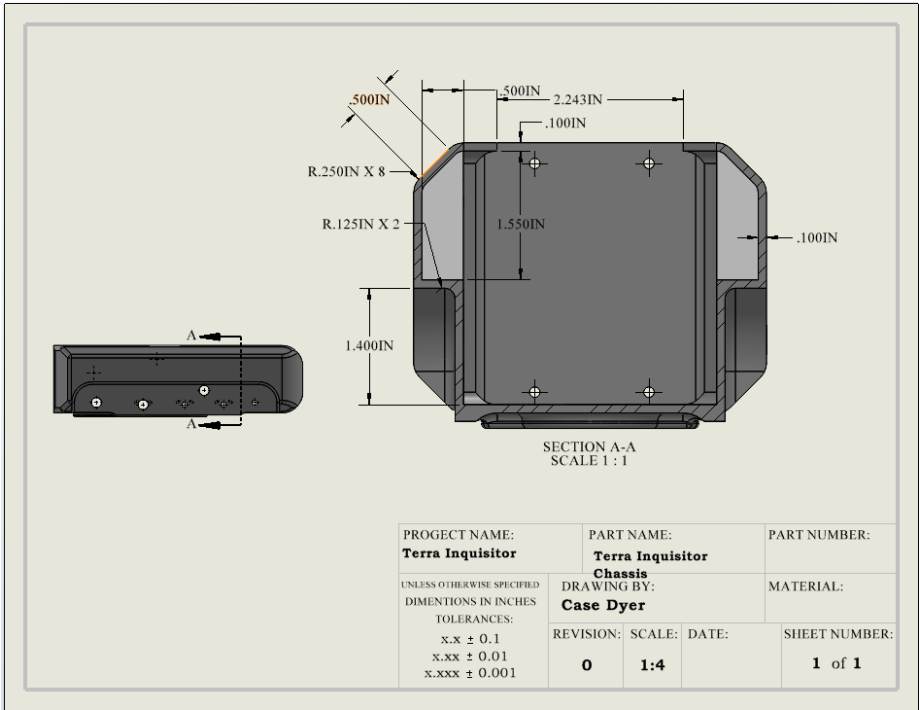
Terra Inquisitor Front Cross-Sectional View
